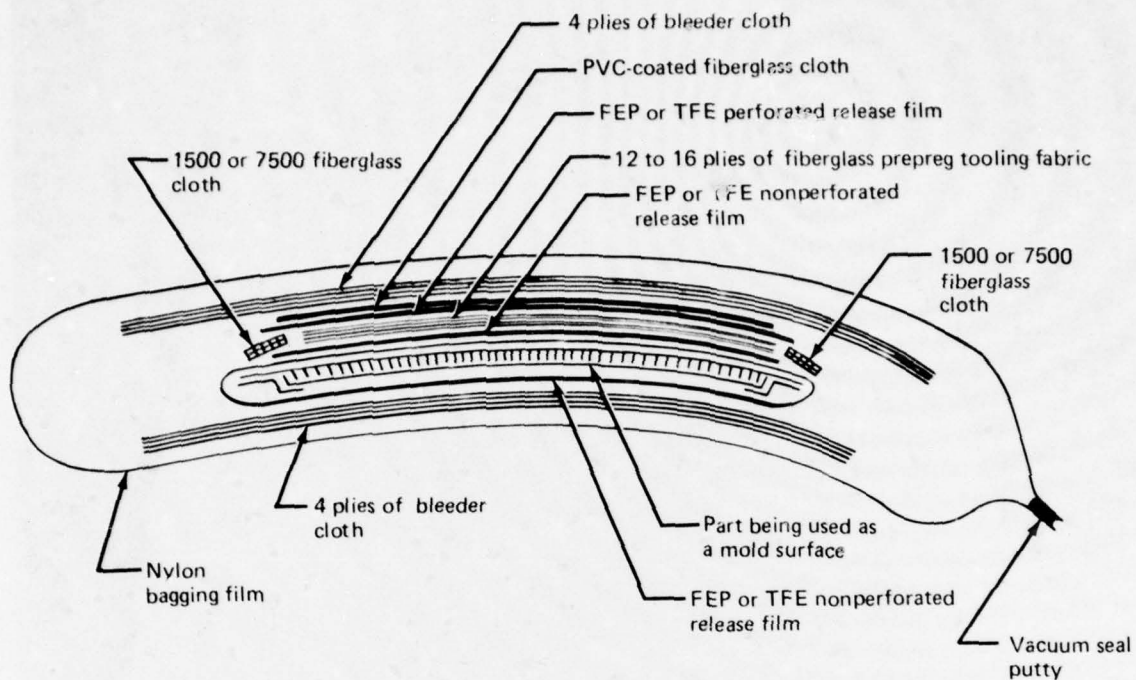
Assembly Components for Fabricating Fiberglass Laminate Bond Tool
